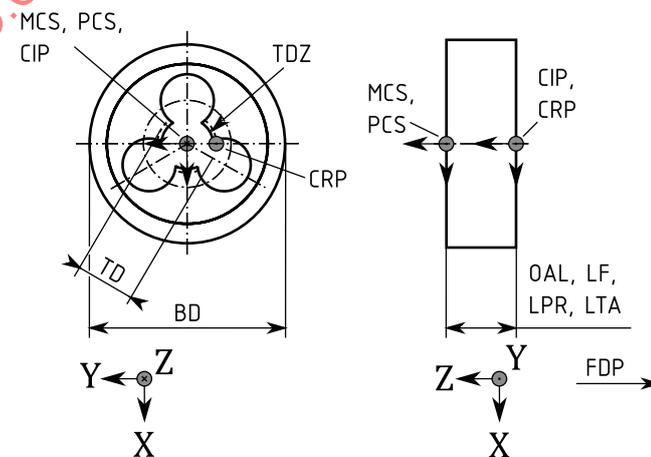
ISYC 301-05 - Thread cutting die, round shape
